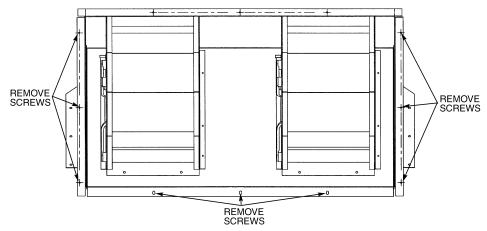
Power Exhaust or Barometric Relief Damper Mounting Details
